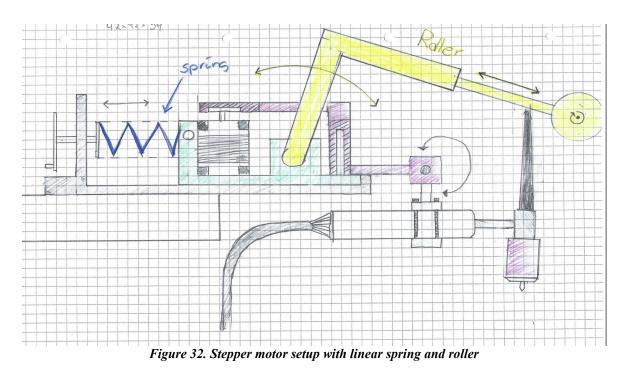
shows a merger between the stepper motor and a linear spring. This design has a spring tighter for pre tightening the roller to the workpiece before welding, and the green hub slides on top of the grey part which is mounted to the "arm". As previously mentioned, we are unsure how good the linear spring will work when welding above center.
